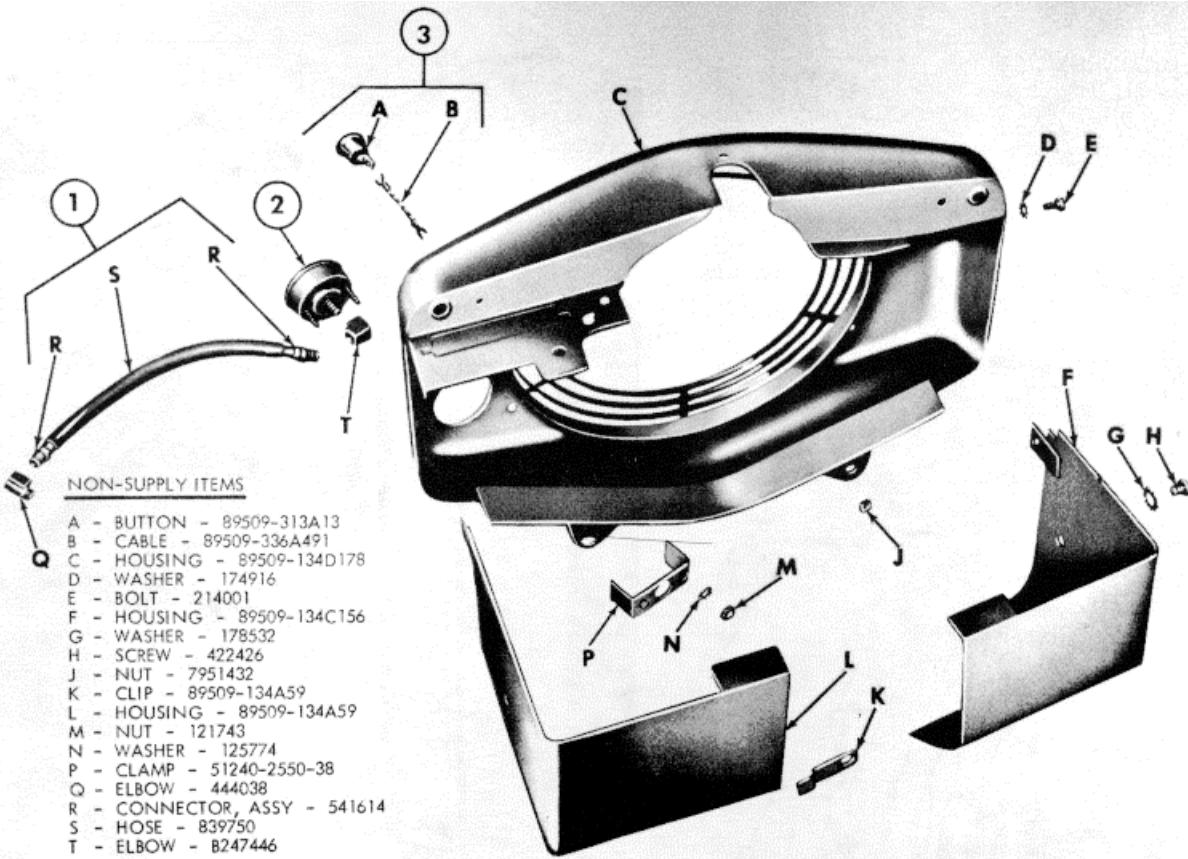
STARTER HOUSING OIL PRESSURE GAGE AND STOP BUTTON
